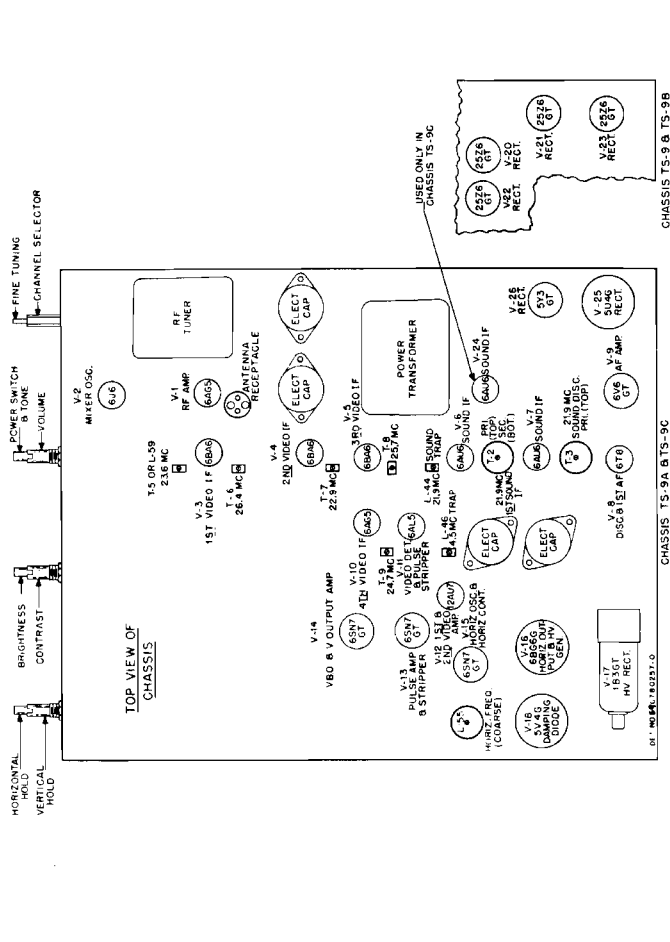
CHASSIS TS-9D TUBE & IF ADJUSTMENT LOCATIONS
